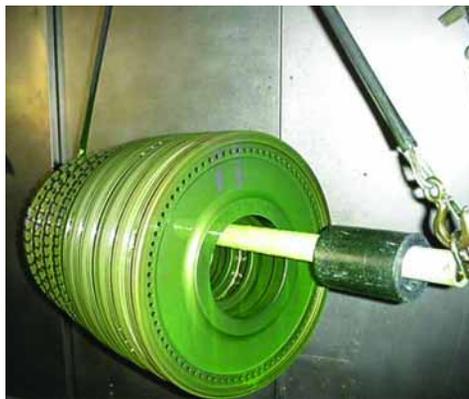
Fixture preventing metal-to-metal contact allows 360 degree rotation throughout inspection process.
